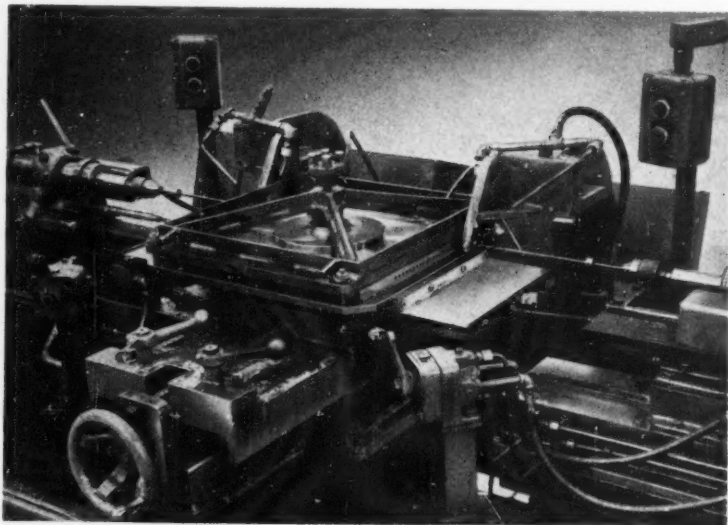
Twenty-five holes of small diameter are drilled from all four sides in this injector plate. The opposed holes must be aligned within a tolerance of 0.005 in. at a depth of 9 in.
